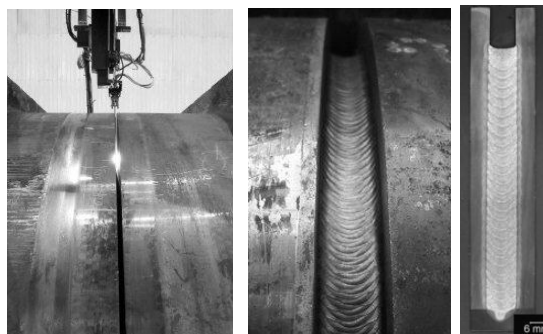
Narrow TIG welding for pressure vessel with large thickness
